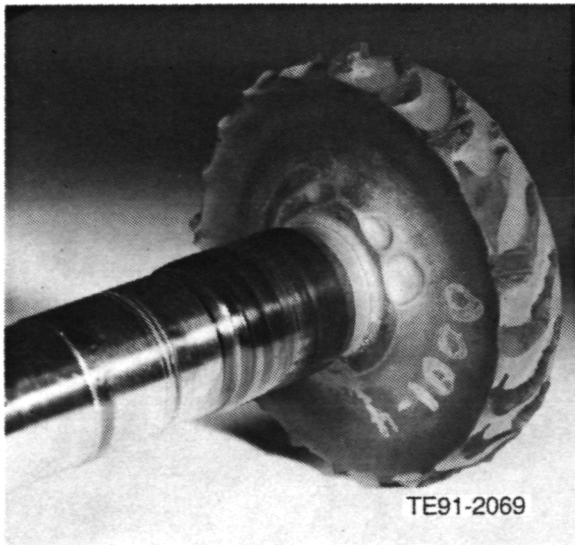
Gasifier turbine rotor (P/N 5-67200, S/N 0001-4) after laboratory cleaning.
